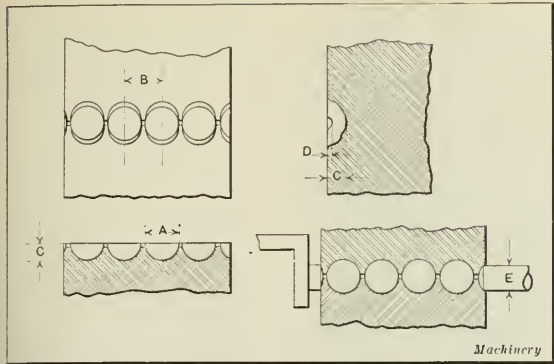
Type of Die used for hot-forging Ball Blanks for Balls exceeding 3/8 Inch Diameter
